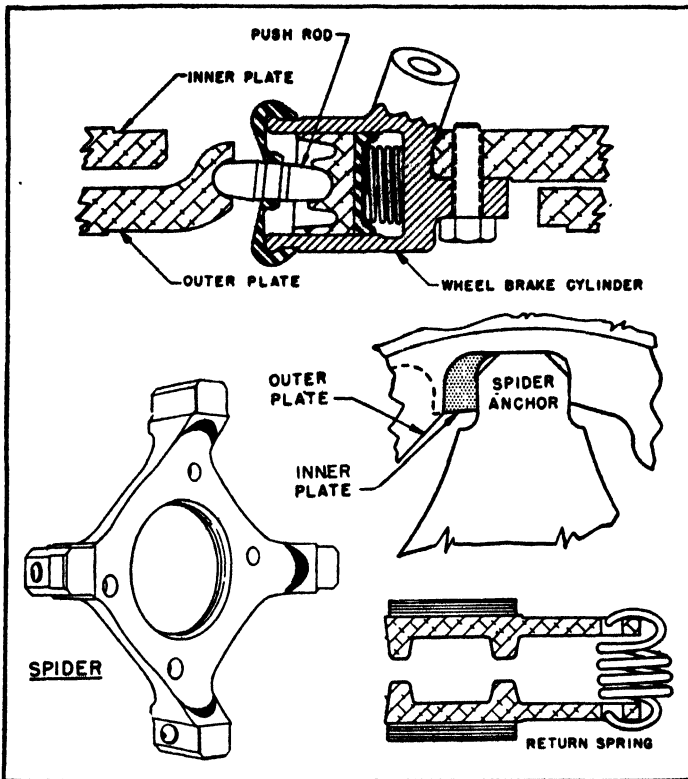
DETAILS OF CHRYSLER DISC BRAKE.
